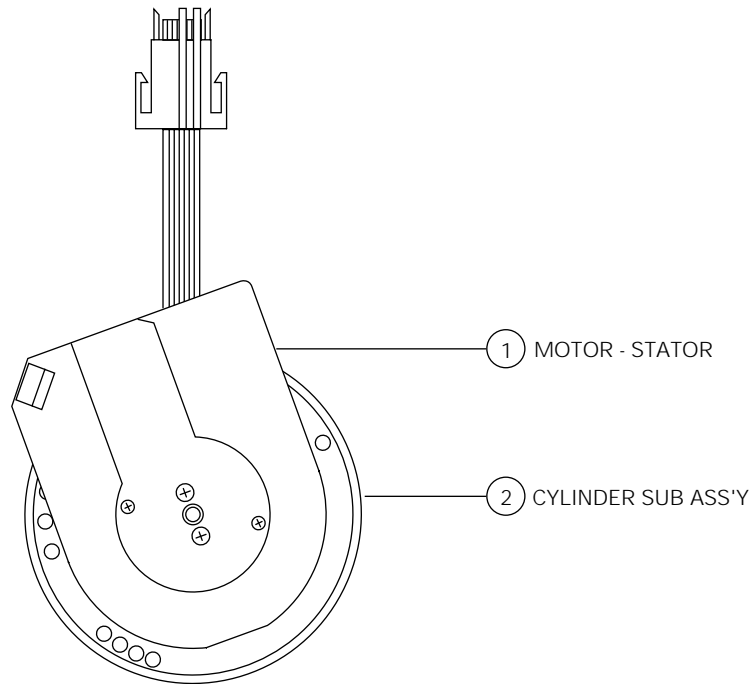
Assembly of Motor Stator and Cylinder Sub Ass'y
